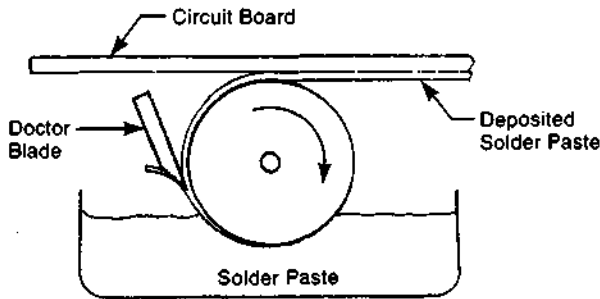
B2b5 The principle of submerged-disk dispensing of solder paste to a printed circuit board.
